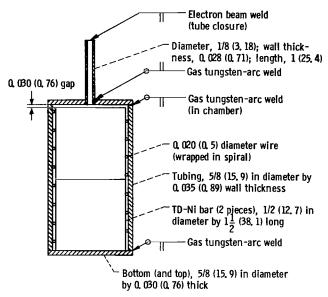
Schematic of 1/2-inch (12, 7-mm) diameter TD-nickel bar specimens in AISI Type 304 stainless-steel cans. Specimens are wrapped with Type 304 stainless-steel wire to minimize misalinement of the specimens at the butt joint. (Dimensions are in inches (mm),)
